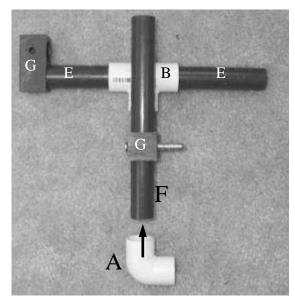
Assembly of the Small Wheelchair (Step 8).
